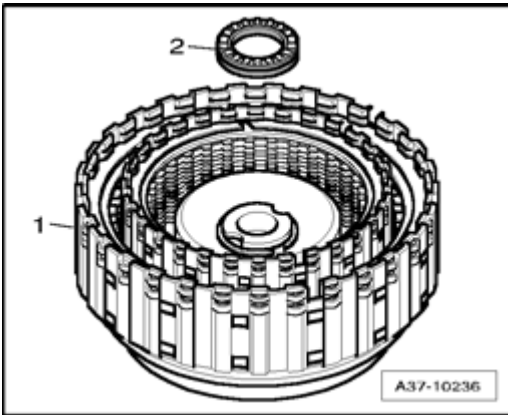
Axial Needle Bearing And Clutch "A/B"
